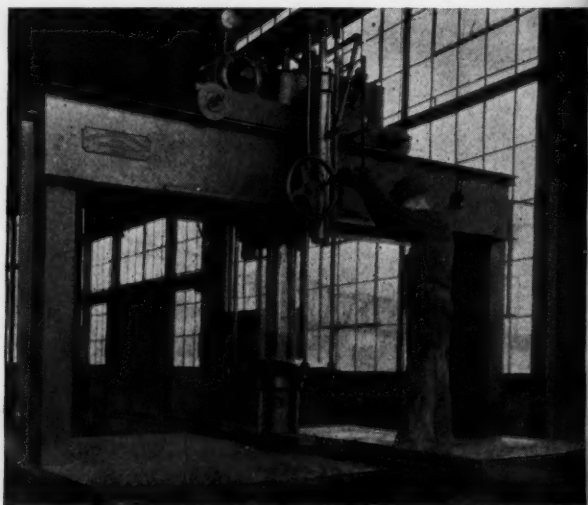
Channel irons, side frames, and other parts that formerly were straightened by heating in the forge are now worked cold with this 25-ton hydraulic press.
